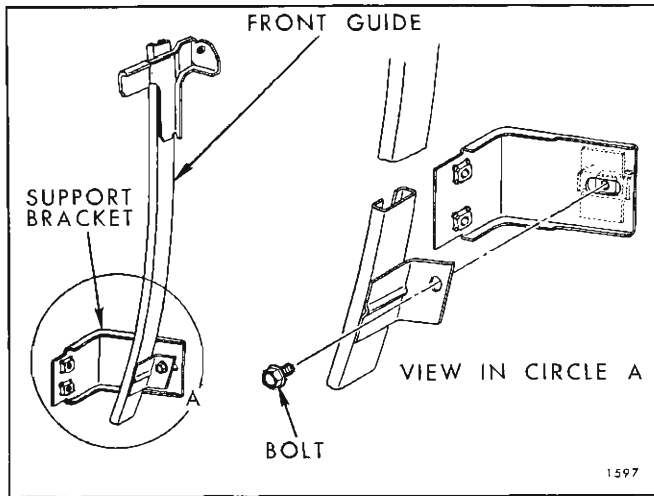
D70—Front Guide to Support Bracket Attachment - 68069 Style
